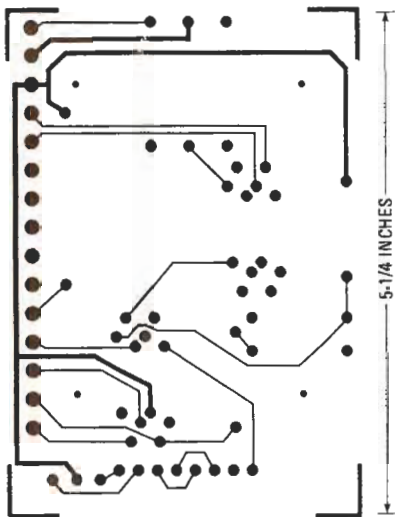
FOIL PATTERN for bottom of telephone adaptor board.
